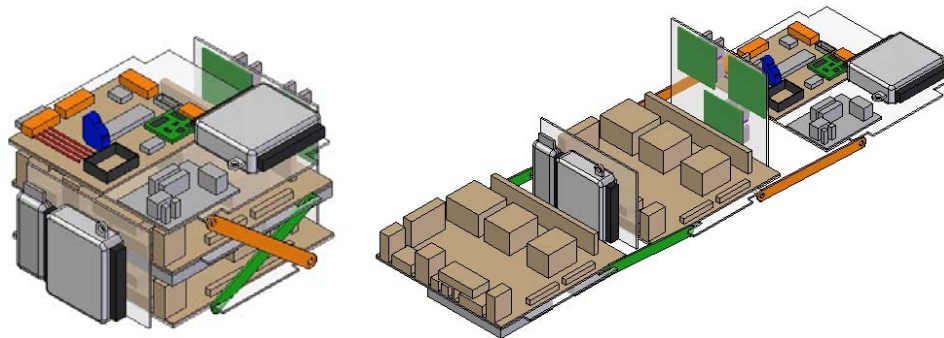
(a) closed internal housing unit (b) unfolded electronics unit allowing full access of all components
